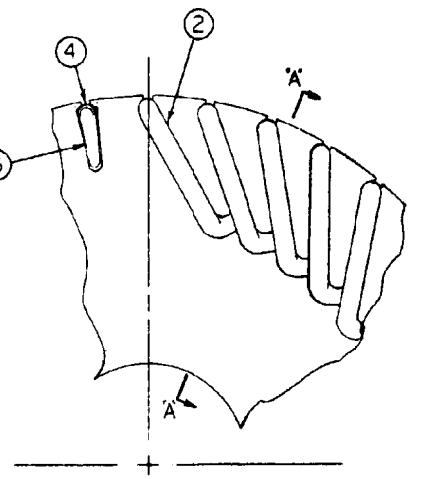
Rotor Winding and Coil Connection (400 Hz)
